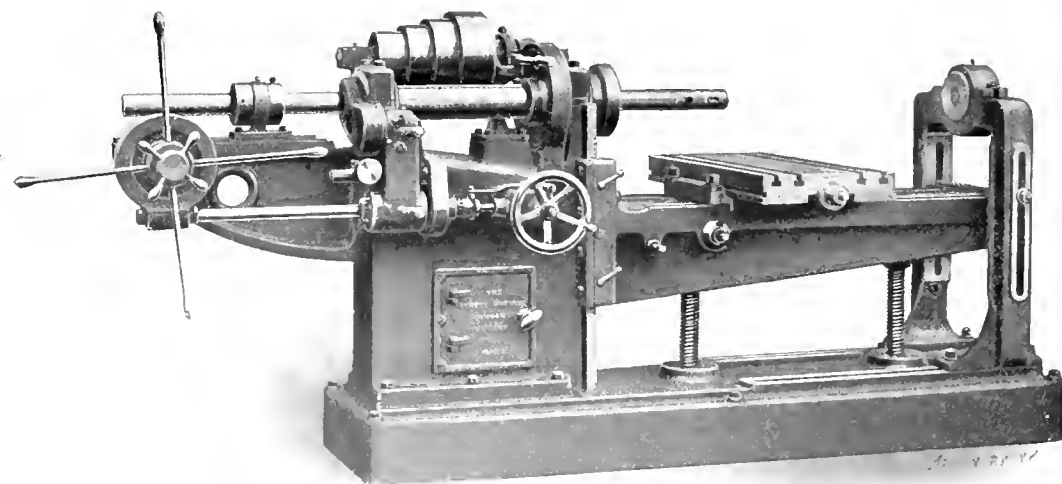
Binsse Boring Machine with Improved Feed Gearing and Other Details
